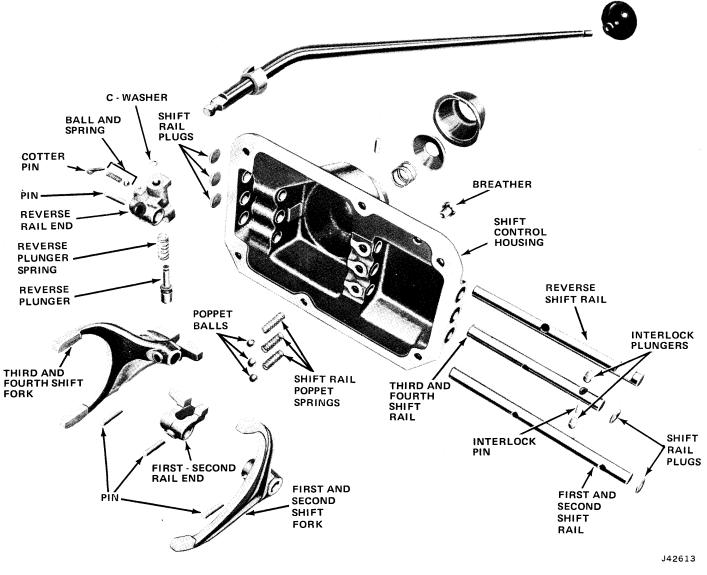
Four-Speed Transmission Shift Control Housing
